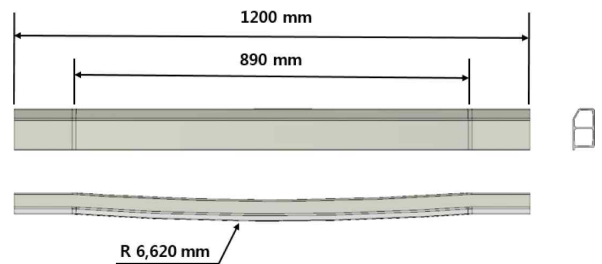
Aluminum bumper beam 3D dimension before/after molding
